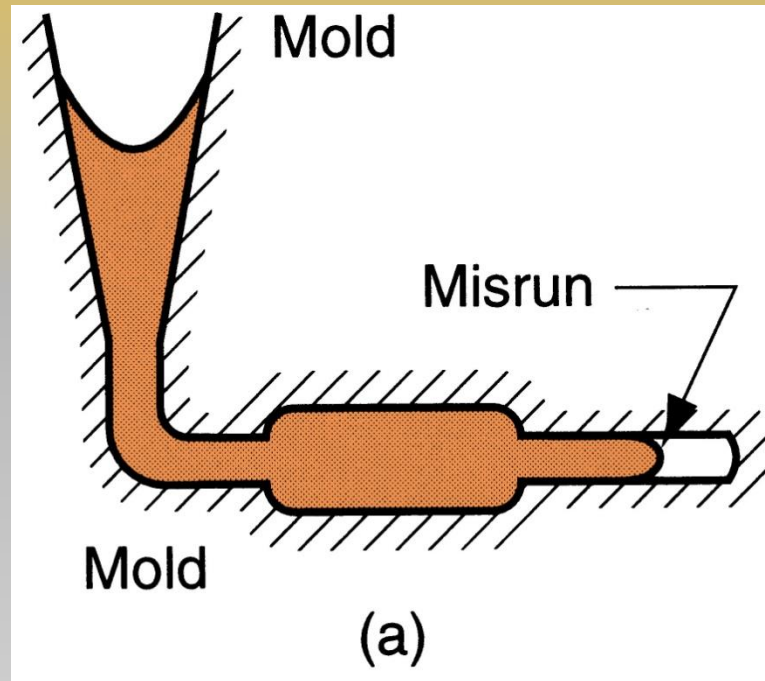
Some common defects in castings: (a) misrun
